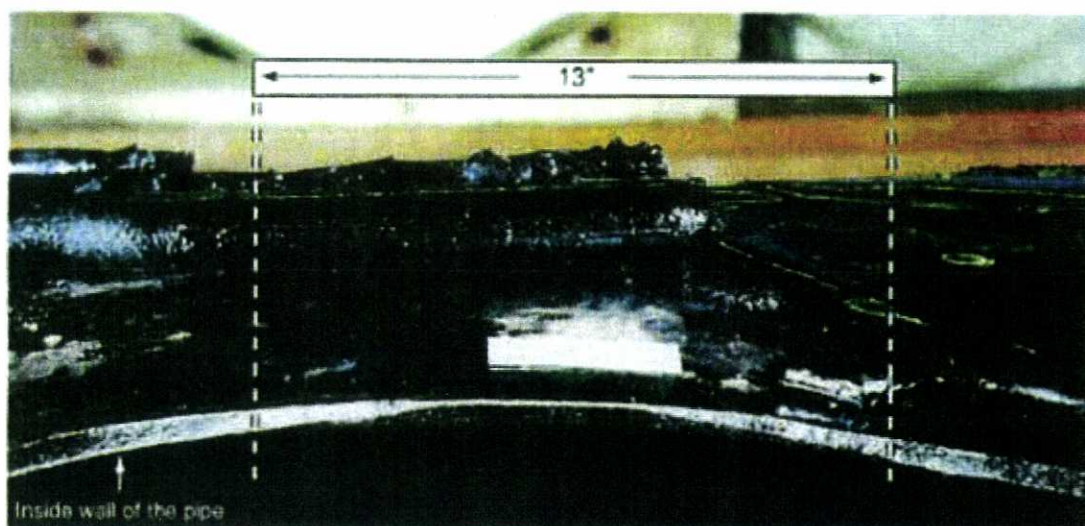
View of top fracture surface of 13-inch-long crack, showing penetration nearly through pipe wall in center.
